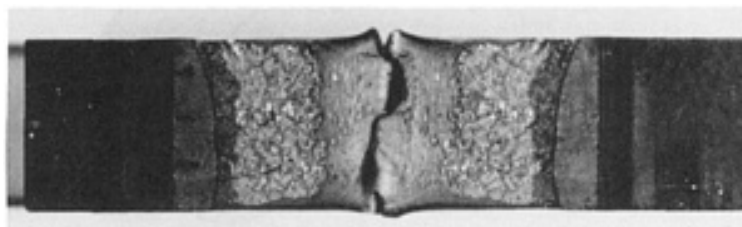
MACROGRAPH OF THE FRACTURE SURFACE OF A CRACK TIP OPENING DISPLACEMENT TEST SPECIMEN REMOVED FROM THE 1.07 M (42 IN.) X-65 STEEL PIPE. THE REGIONS OF THE SURFACE SHOWN CORRESPOND WITH THE NOTCH, PRECRACK, STABLE CRACK GROWTH, FAST FRACTURE, AND OVERLOAD ZONES.
